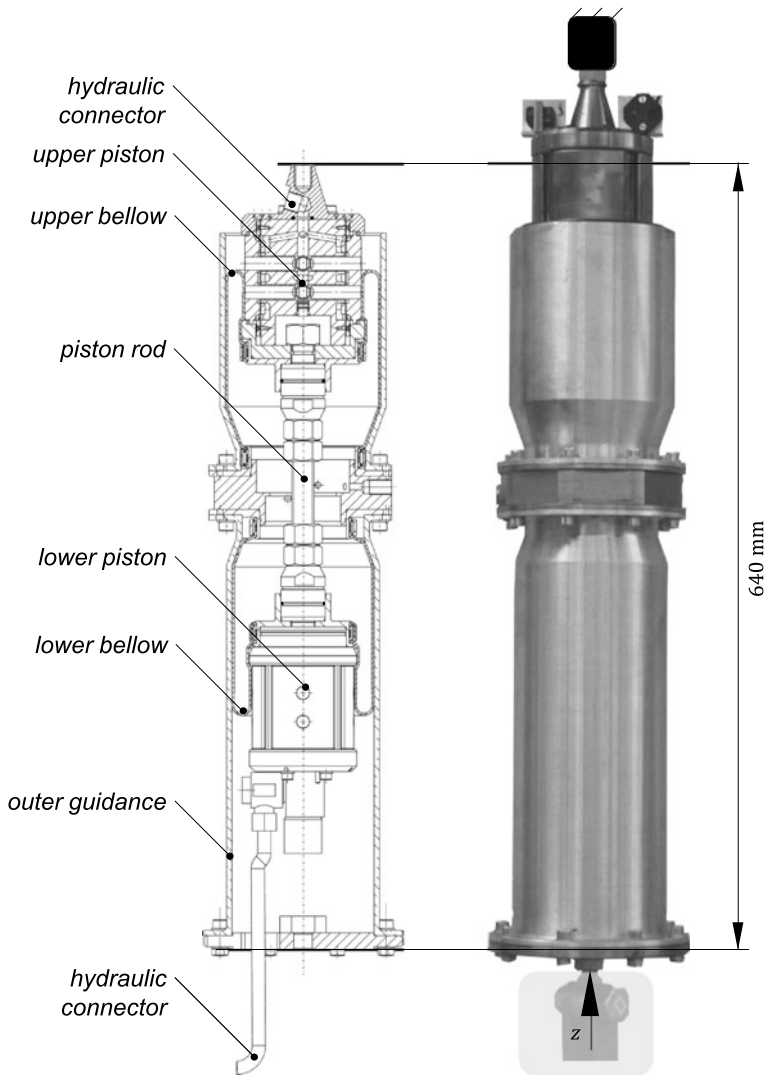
Technical prototype of the Active Air Spring [20]
